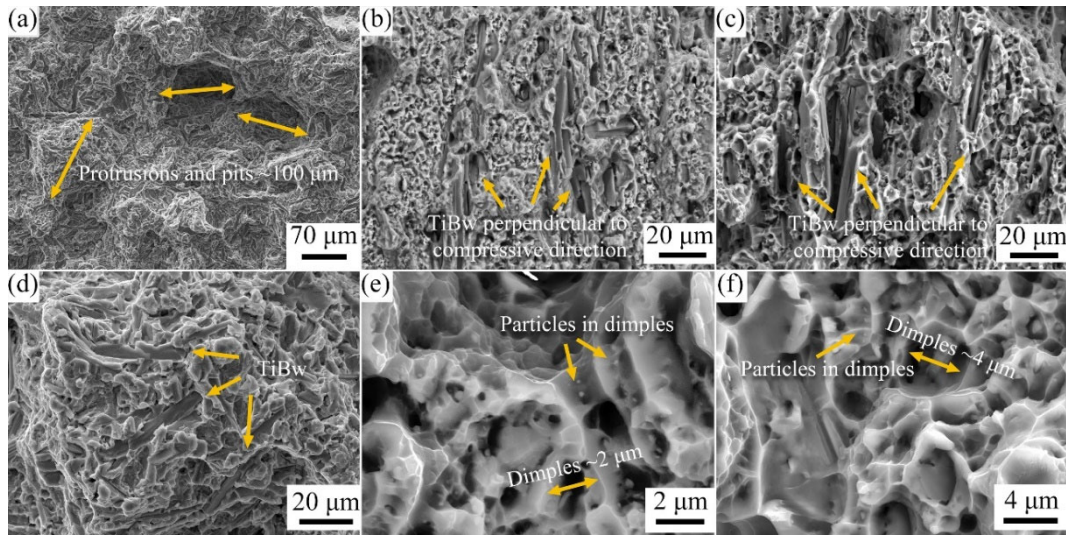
Fracture surfaces of S-Ti, ST-Ti and STP-Ti, (a), (d) S-Ti, (b), (e) STP-Ti, (g), (f) SP-Ti
